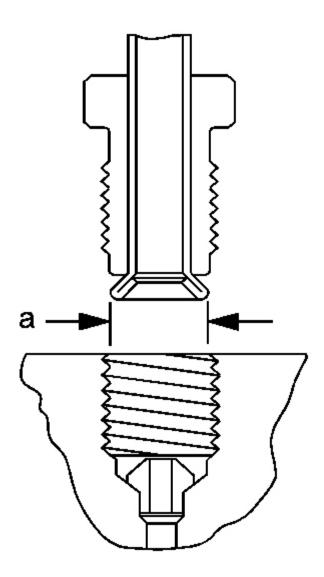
Identifying Correct Brake Pipe Flare Shape & Diameter Courtesy of GENERAL MOTORS CORP.
